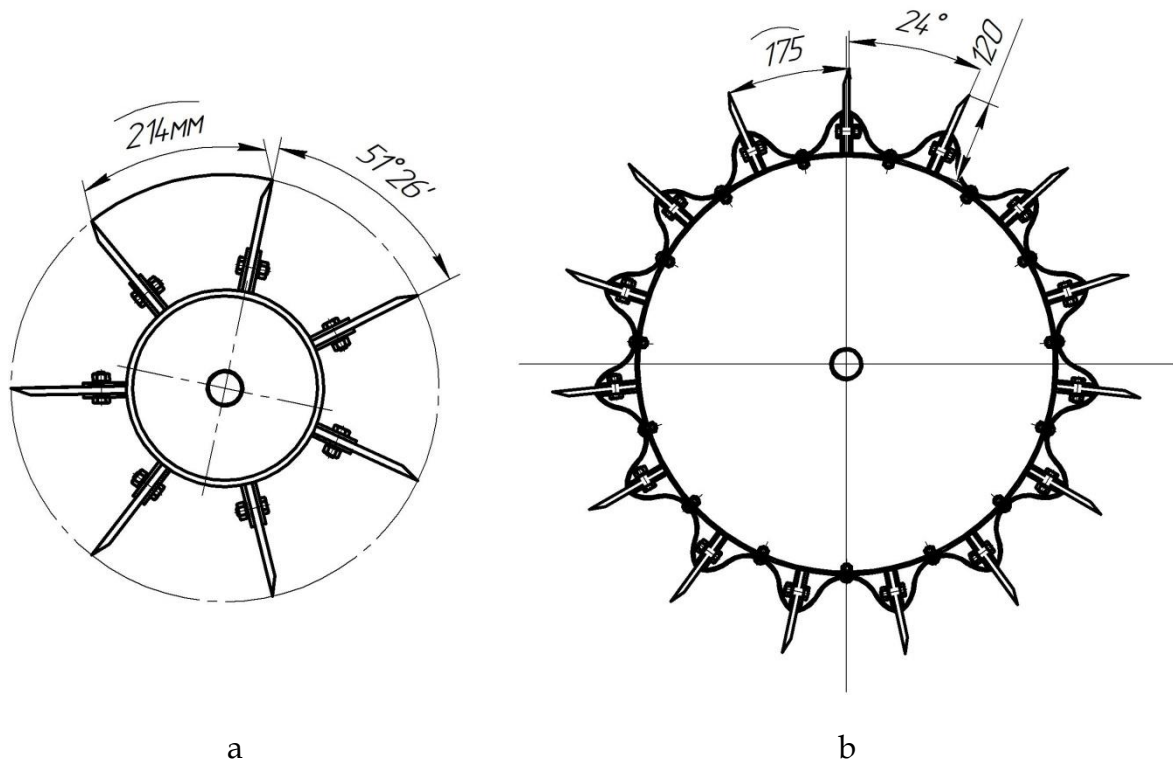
Blade Arrangement on the Surface of the Crimp-Roller Drum for Plant Residues:
